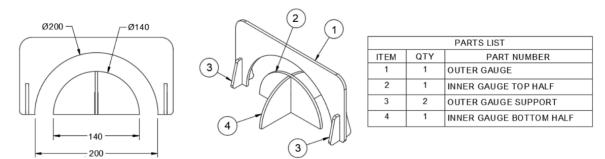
(Left) A front view of the dome inner and outer gauges fully assembled and together, with critical dimensions noted. (Center) Isometric view of the inner and outer dome gauges fully assembled and together. (Right) Parts list describing each gauge component, corresponding to the center isometric view. Units are in [mm].
